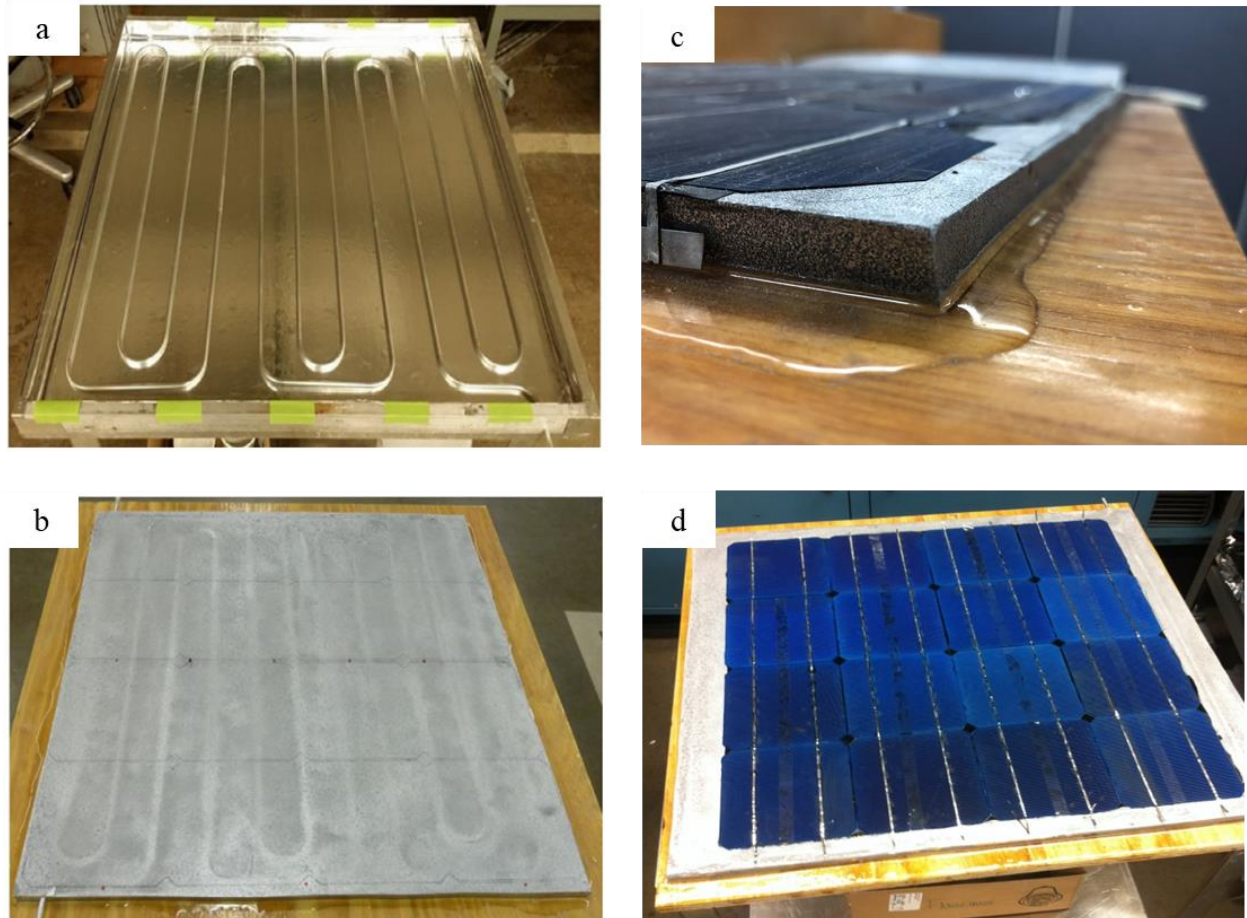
Illustration of the FGM BIPVT panel fabrication and testing: a. built-in water tubes inside the mold; b. functionally graded panel with built-in water tubes; c. adhesive epoxy for FGM panel fixing onto a plywood panel; d. FGM panel prototype
